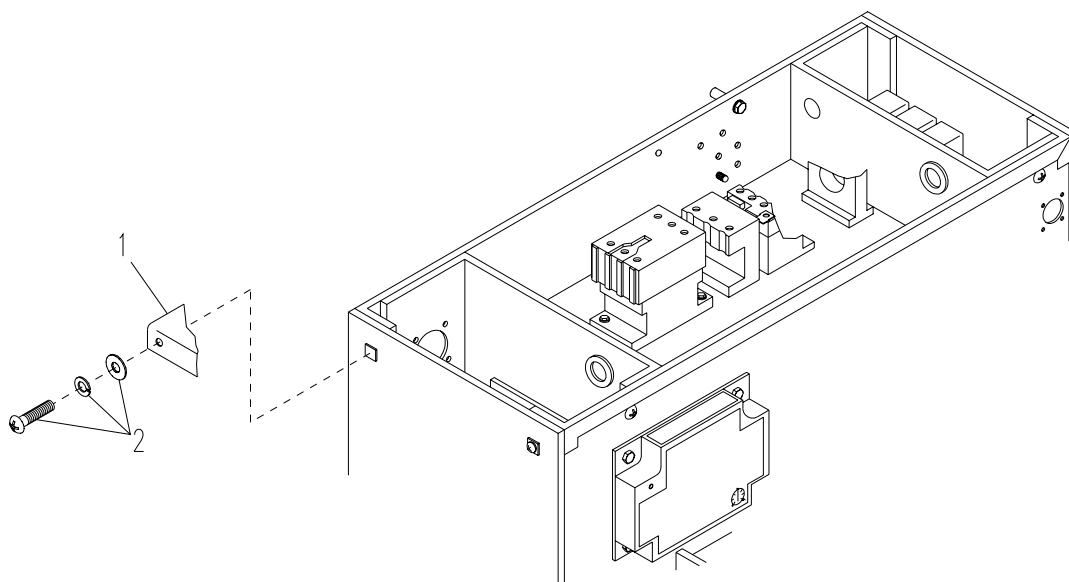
Frame Assembly and Vibration Isolator Mount Assembly (Sheet 1 of 6)
